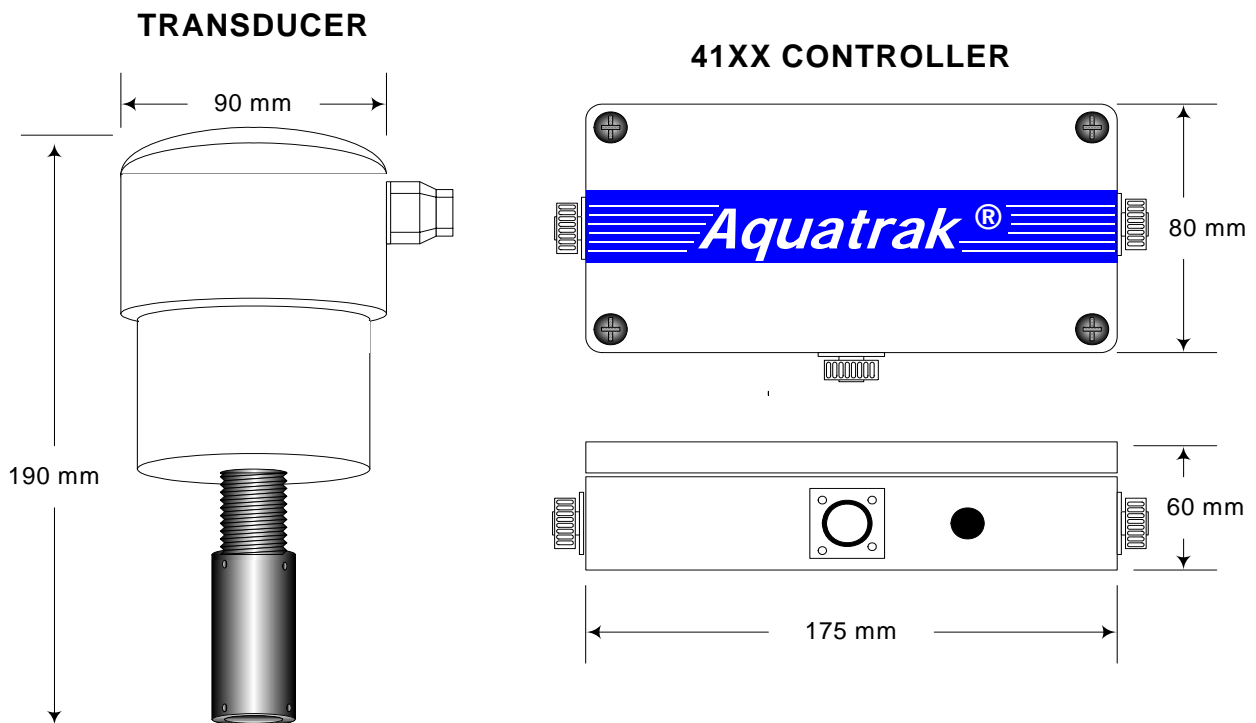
Dimensions of the Model 41XX Series Controller and Transducer
